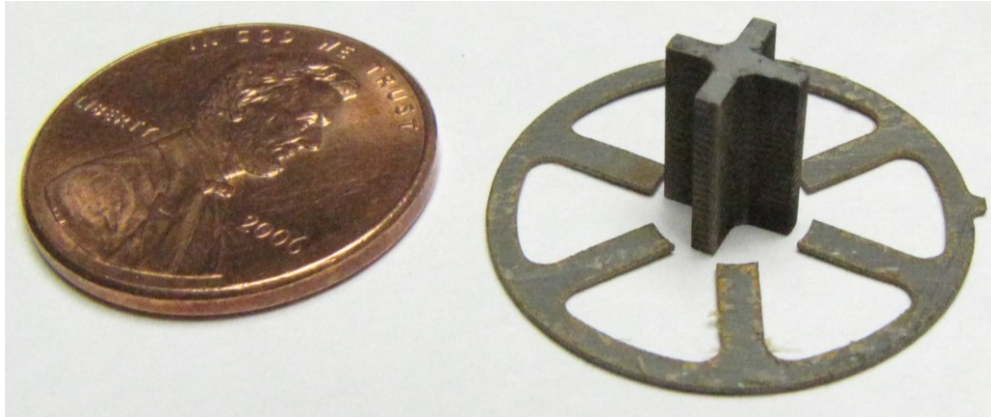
Single laminate of a stator and laminated stack of a rotor. Characteristic dimensions: Rotor tooth width: 1.1mm; Stator tooth width: 1.8mm; Air gap between stator and rotor: 350microns
